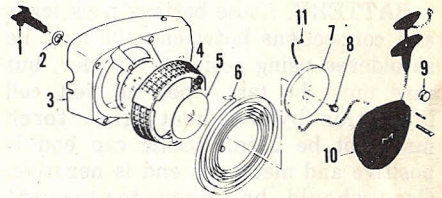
Exploded view of left hand starter used on U.S. models and some export models.
